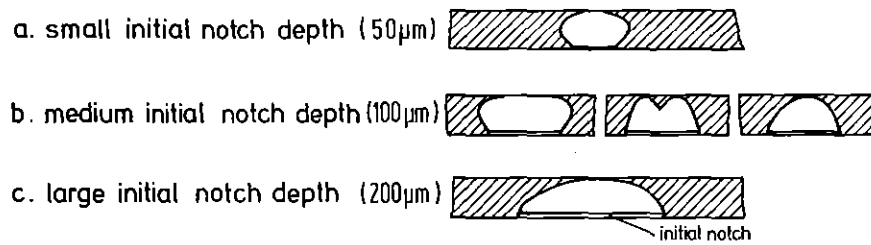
Longitudinal fracture surface geometries at 600°C for different initial notch depths.
